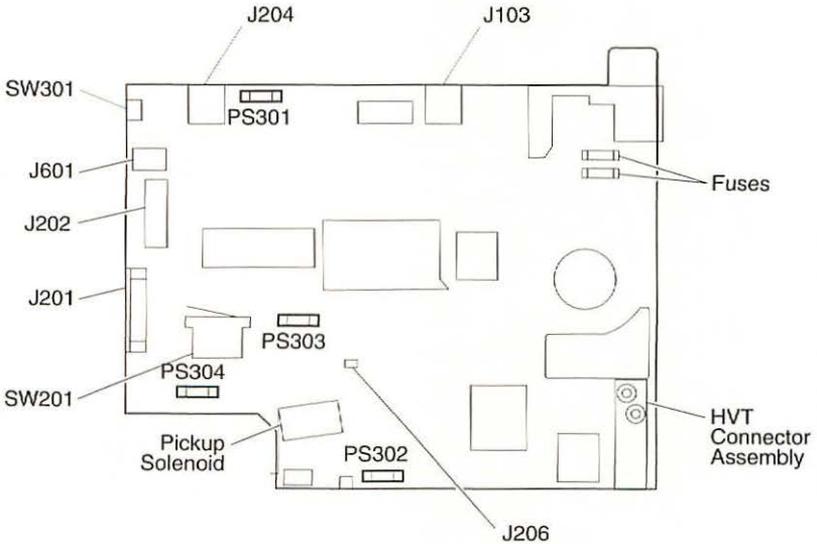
Personal LaserWriter 320 Controller Assembly Board
